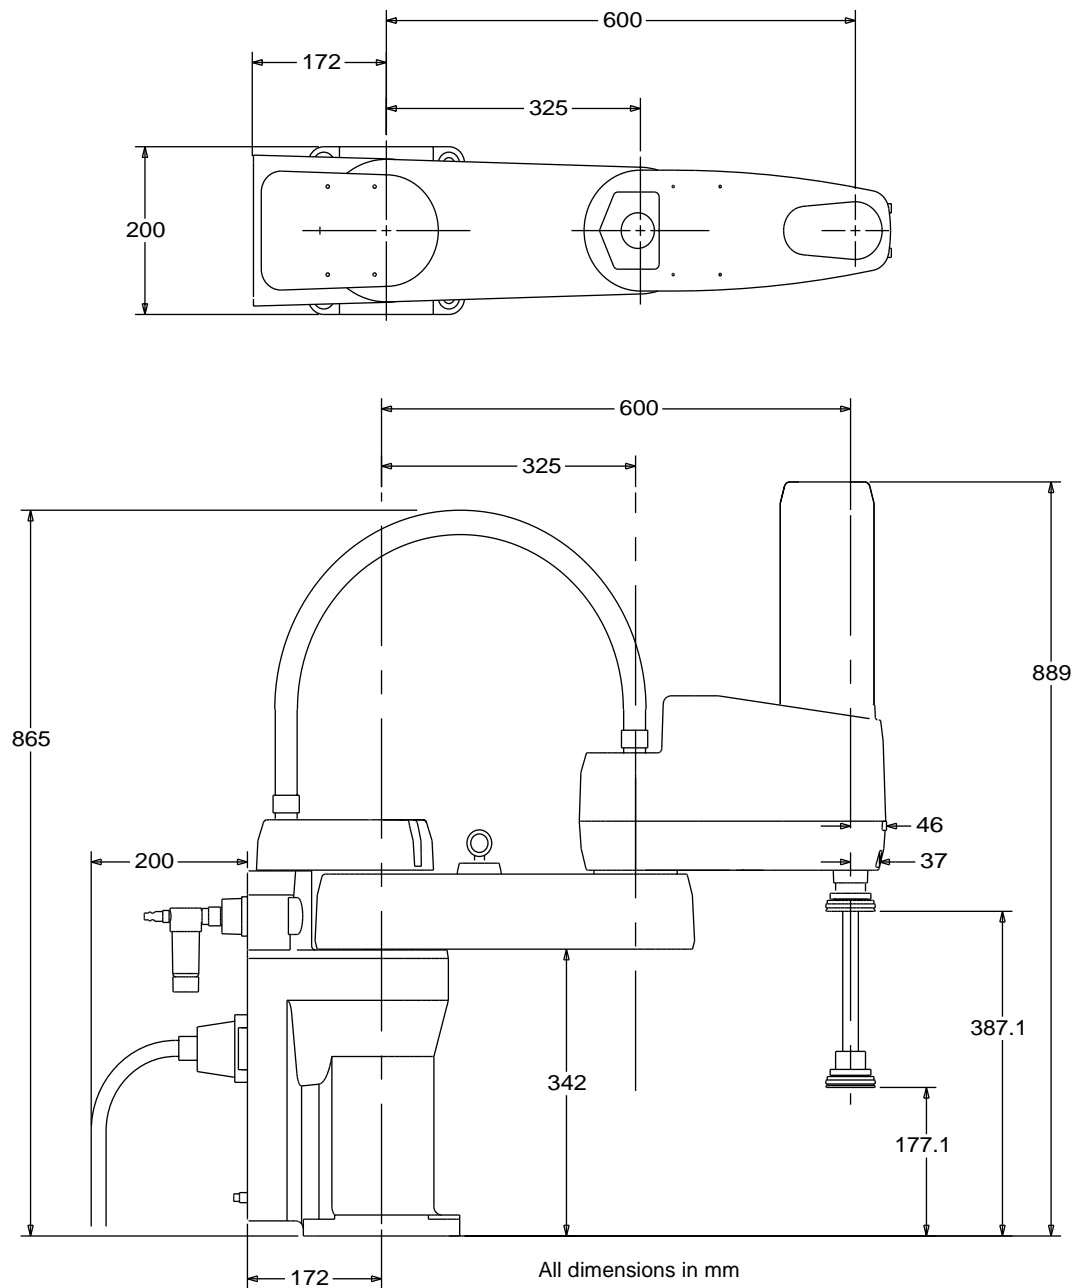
Adept Cobra 600 Robot Top and Side Dimensions
